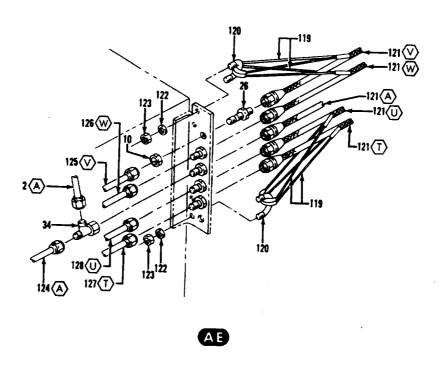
Tubing Installation (Sheet 10 of 17)
